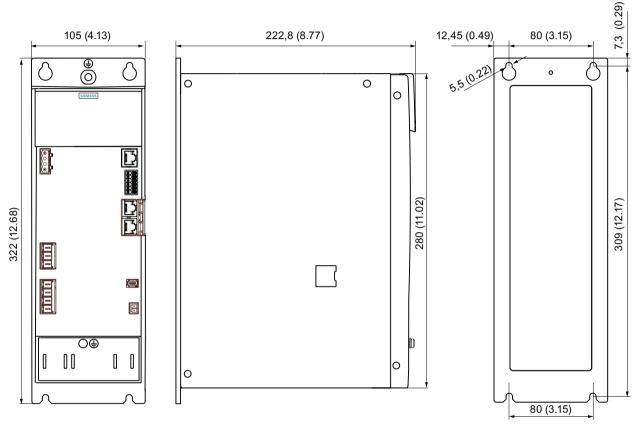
Dimension drawing SINAMICS S210 FSC, 3 AC, dimensions in mm (inch)
